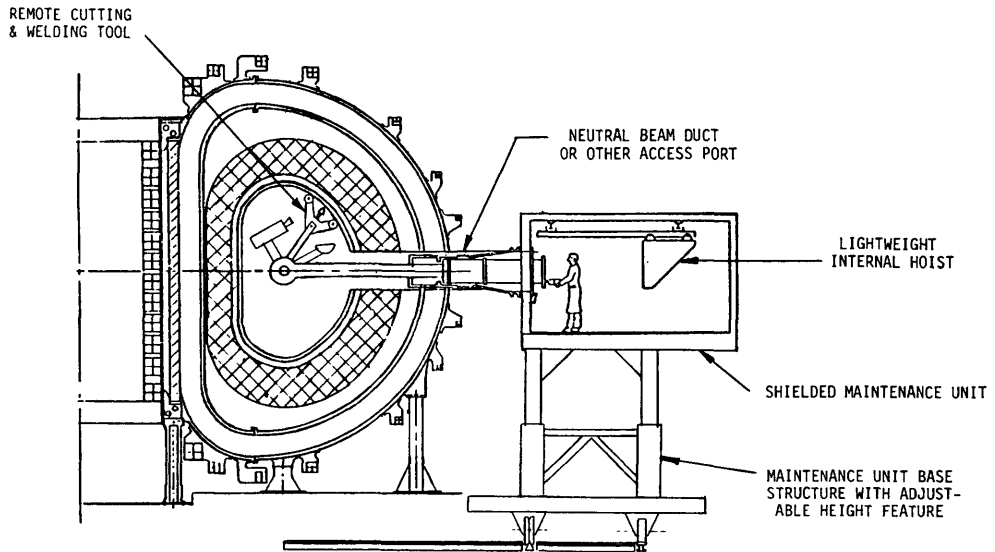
B2. A shielded mobile cutting and welding unit. From M. Sniderman, EPRI ER-1046 (1979), Fig. A-5.
